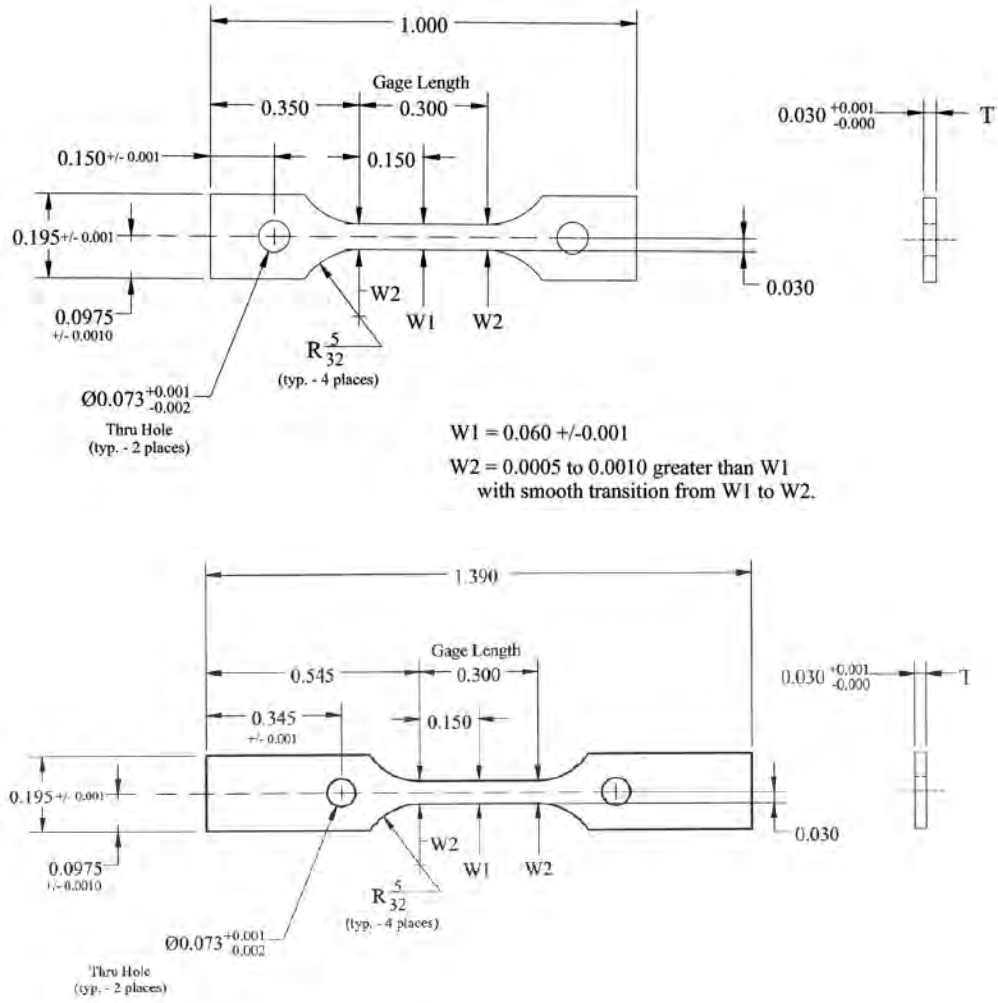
Schematic drawing of sheet-type tensile specimens (unit: inch).
